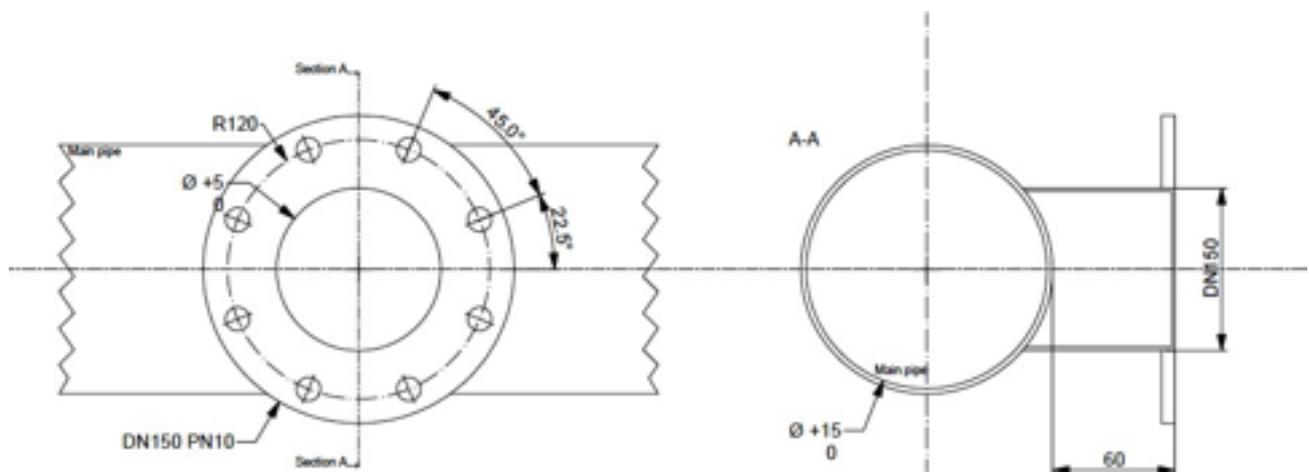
Technical drawing of DN150 pipe and DN150 flange welded to main pipe (main pipe not to scale). All distances in [mm]
